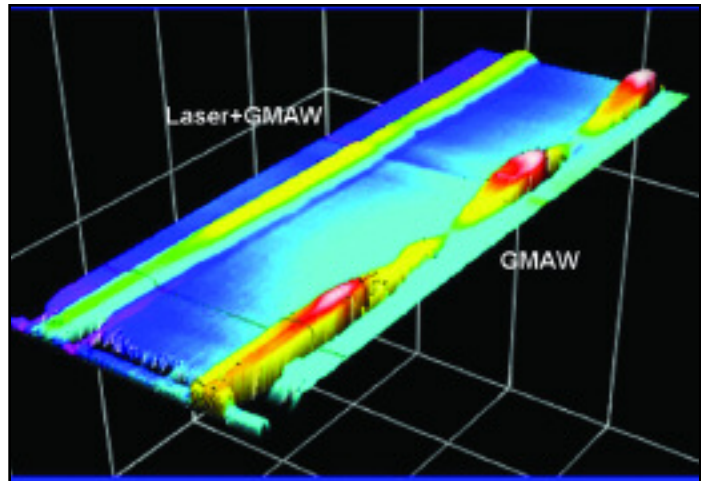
Surface contour images of a GMAW-only weld with hump defects and hybrid process weld with desired weld bead shape. Travel speed was 80 in./min (2 m/min), and GMAW process settings were the same in both cases.
